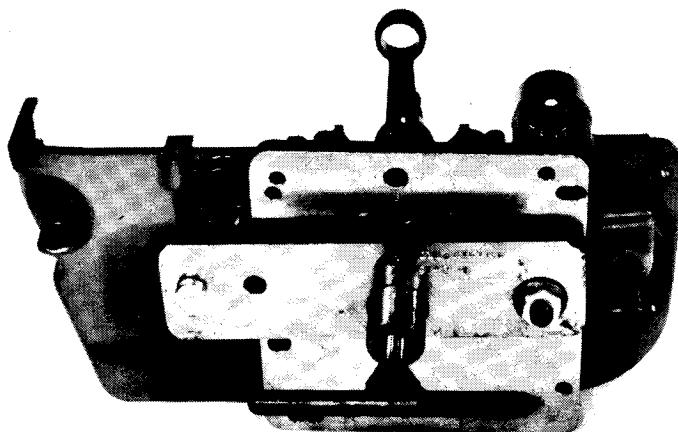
To remove crankshaft use puller 9142 and 9142-1.
